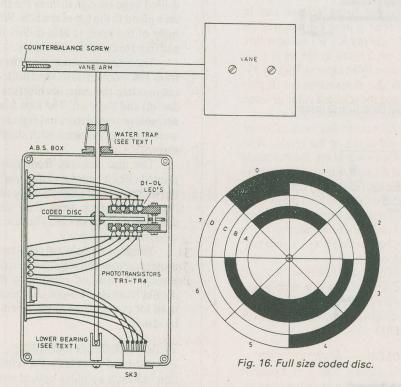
Mechanical details for the Wind Direction Vane Head. The sensor bracket holding D1-4 and TR1-4 should be adjustable for aligning with the coded disc.
